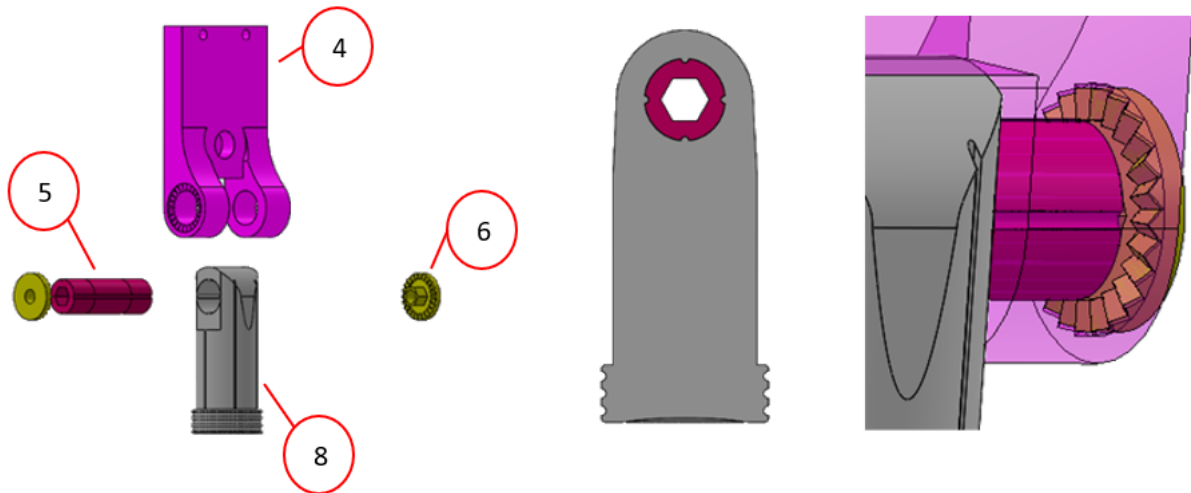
Exploded view of the set that allows angle adjustment (on the left). Cutaway view of the lilac shaft fitted to the cylinder piston (in the centre). Detail of the angle lock system (right).
